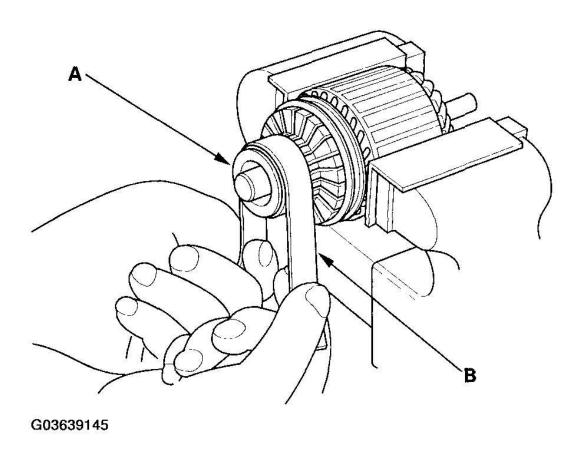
Checking Commutator Surface Courtesy of AMERICAN HONDA MOTOR CO., INC.
